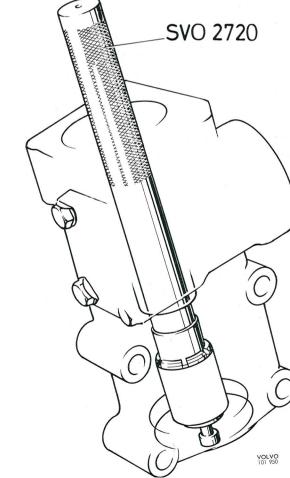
Removing the bushes, pitman arm shaft, II
